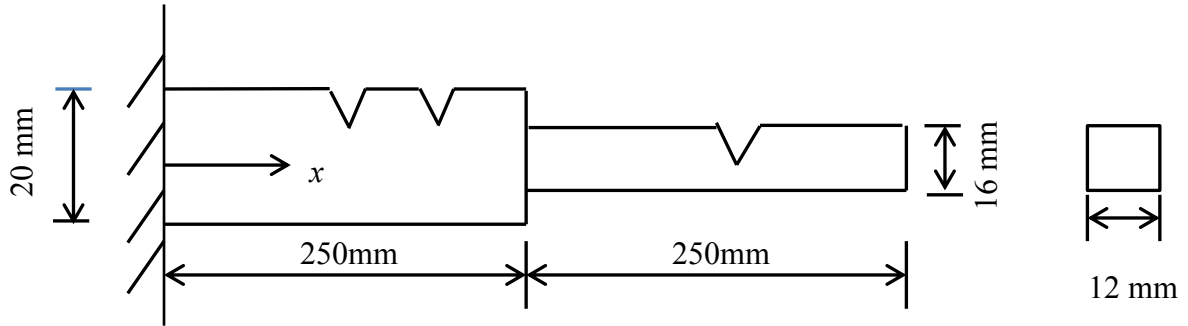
Sketch of Triple Cracked Two Step Cantilever Beam
